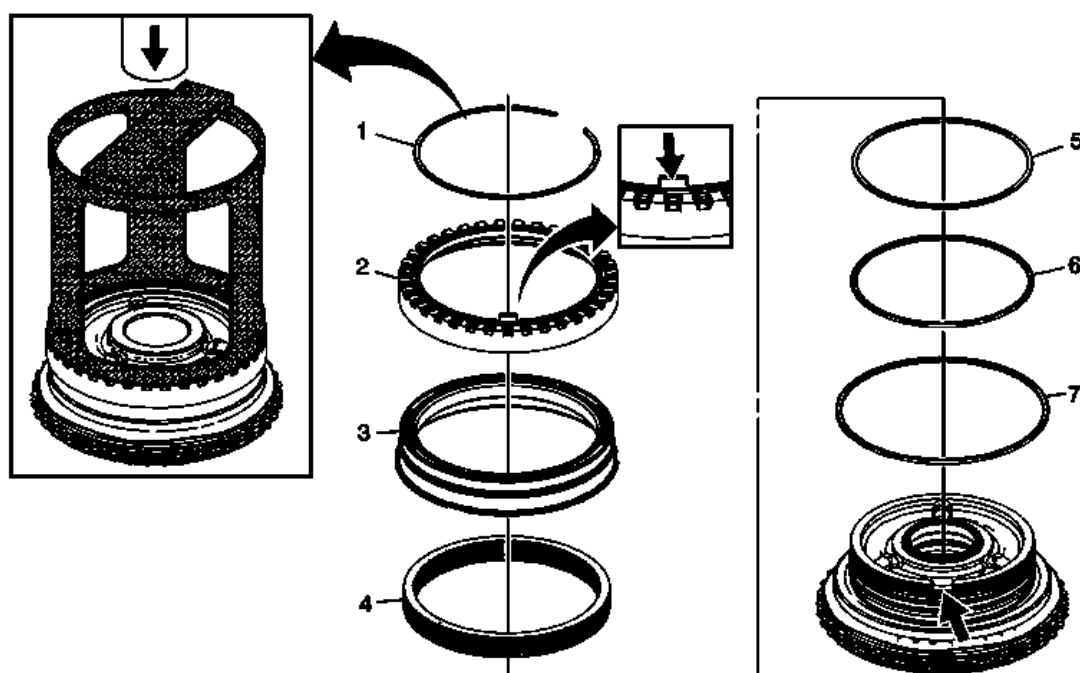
Disassembled View Of Reluctor Wheel & Piston
